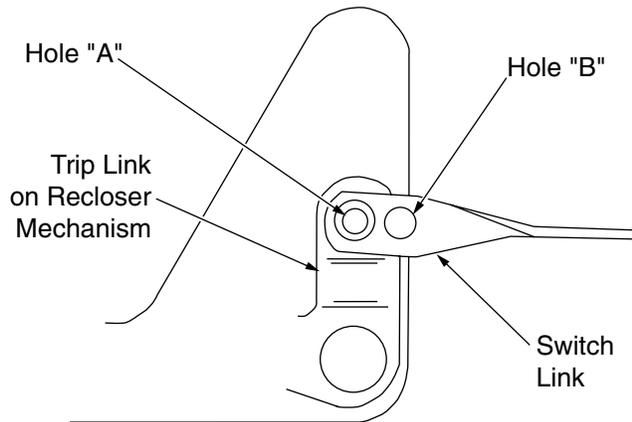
Assemble switch link using hole "A" or hole "B" per Table 2.
